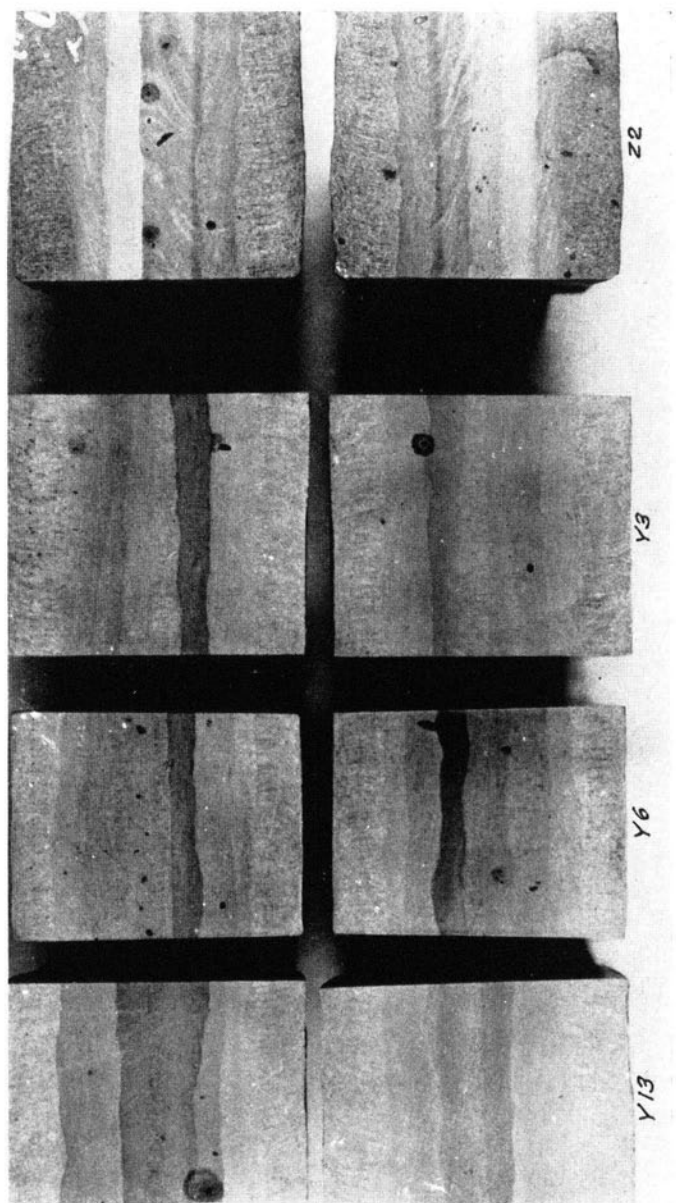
PHOTOGRAPHS OF SPECIMENS MACRO-ETCHED TO SHOW POROSITY IN WELD METAL
